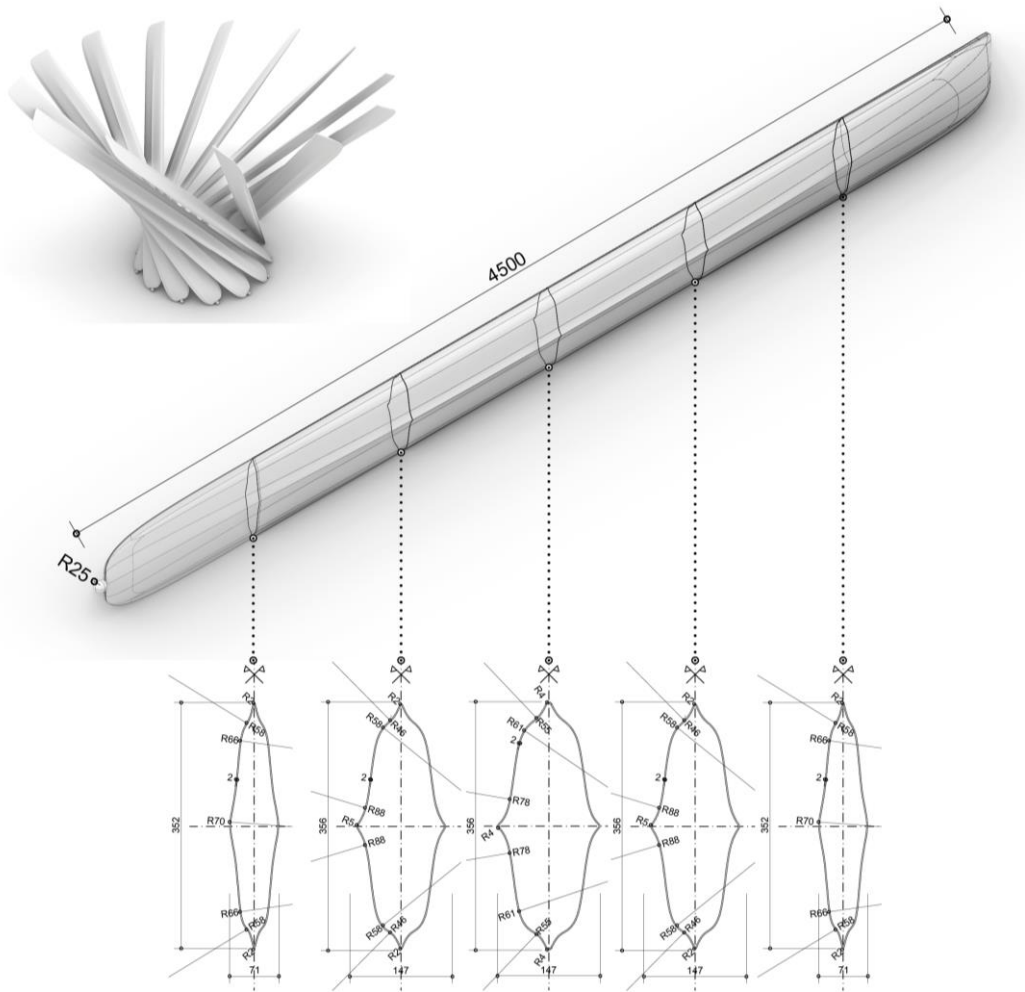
Radial arrangement of the 13 uniquely shaped inflated elements, perspective view of the single element and its progressive cross sections. All units of measurements are in millimeters and refer to the final pieces. The prototype is scaled 1:2.
